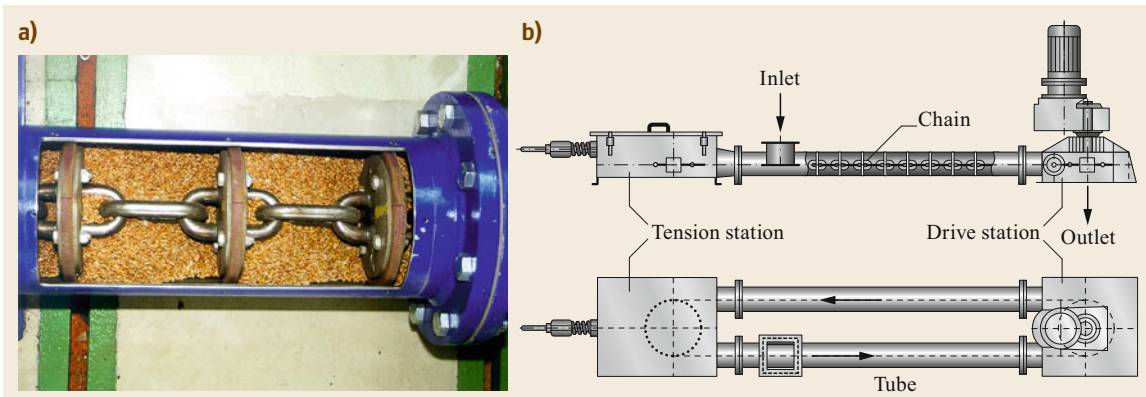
,b Tube chain conveyor principle [20.6] (a) and general layout [20.121] (b)
